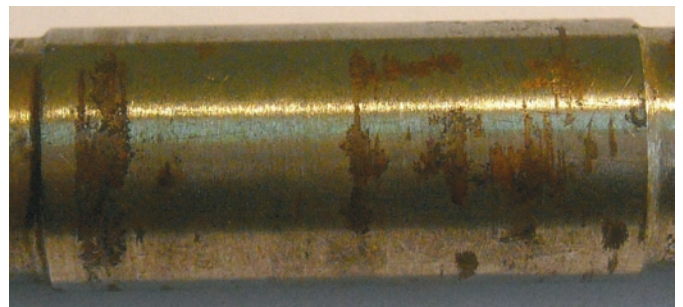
Base shaft surface after fatigue tests - distinct traces of fretting wear on the shaft edges of lower intensity into the connection centre, magnified about 3x [6]
